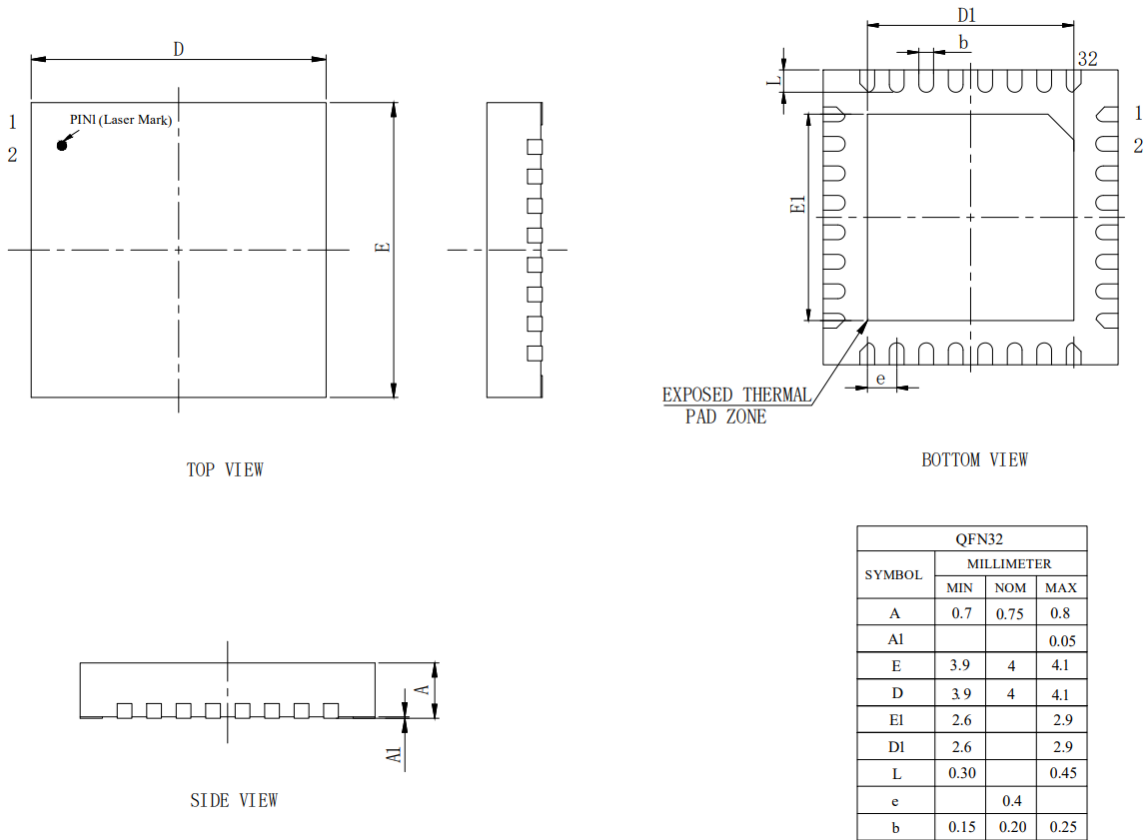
ET8161N QFN32_4X4 Package Drawings and Dimensions
